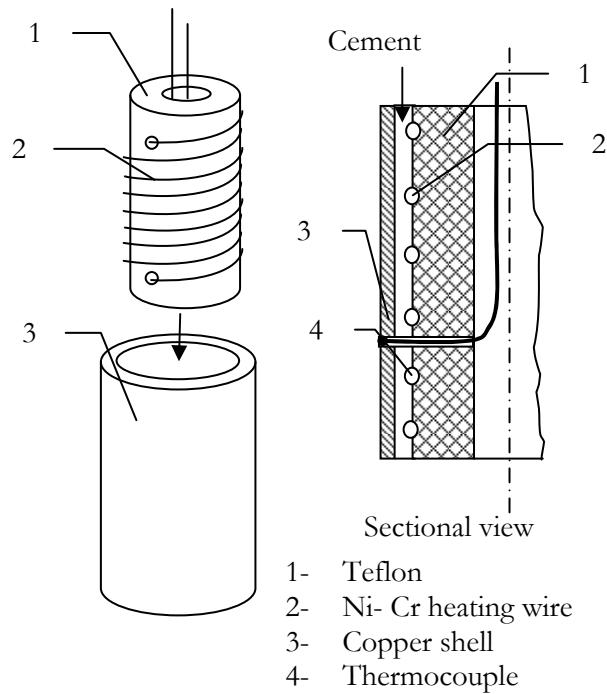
Heating section assembly and sectional view (not to scale and simplified)
